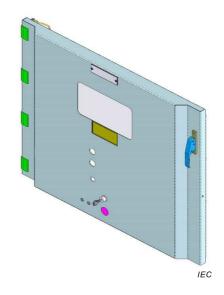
Special type of key-lock as replacement for a standard key-lock in the door of air insulated switchgear
